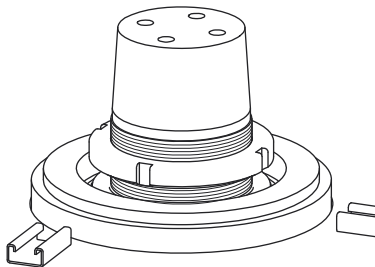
Loosen Bottom Locknut (Do Not Remove)
